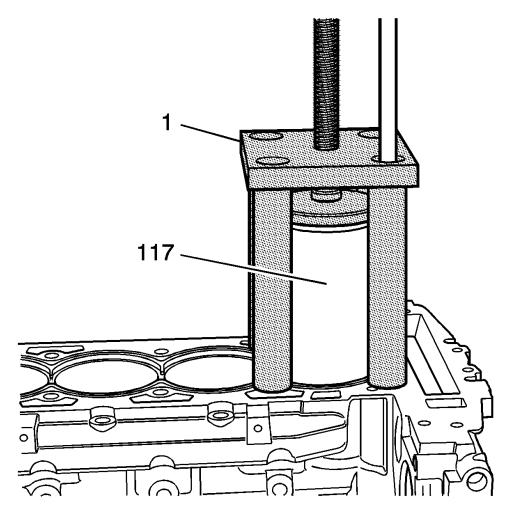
View Of Cylinder Bore Sleeve Fixture Courtesy of GENERAL MOTORS CORP.
